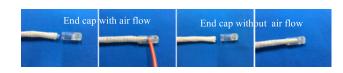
Fabrication of both end part of 4.0 mm actuator.
